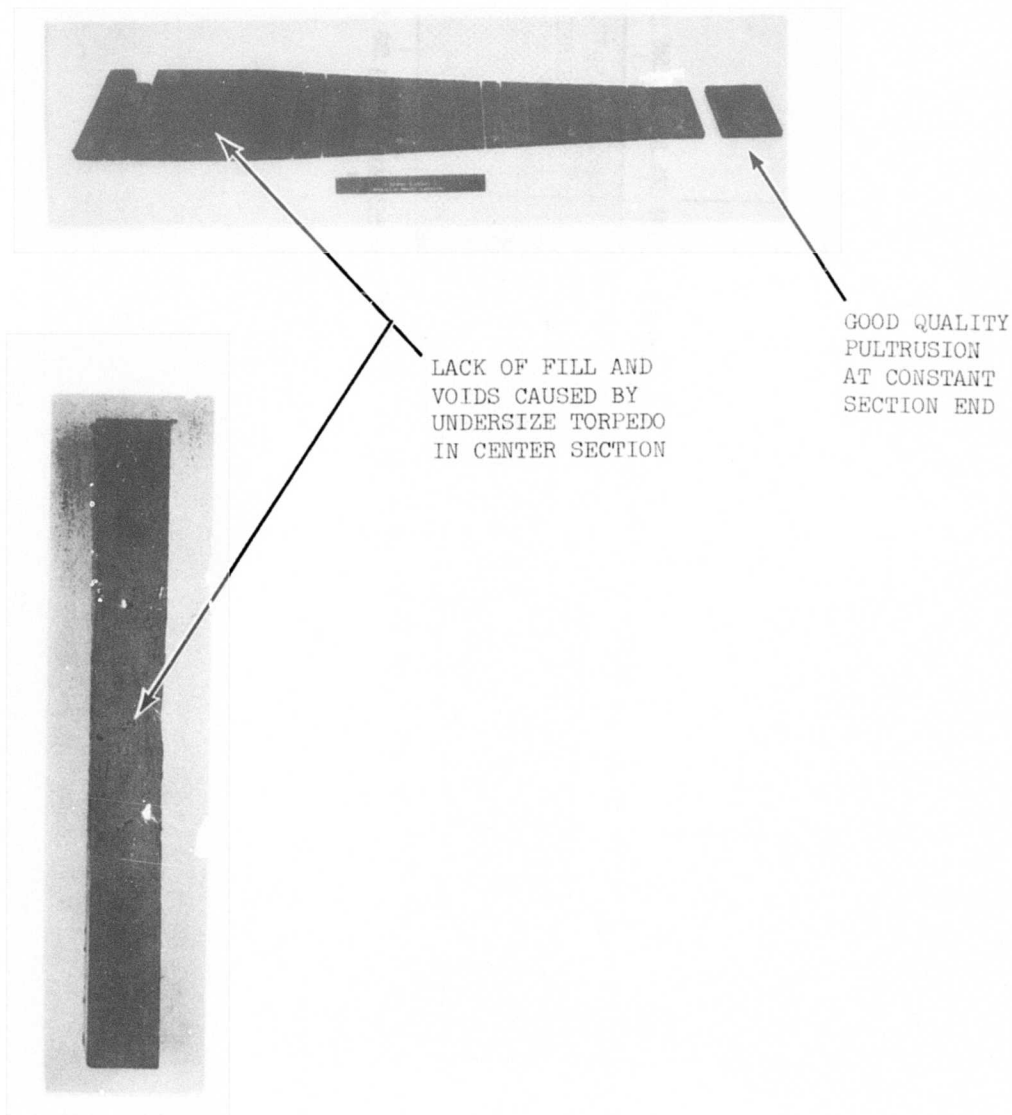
Appearance of 30-inch Spar Specimen, S/N 3.
